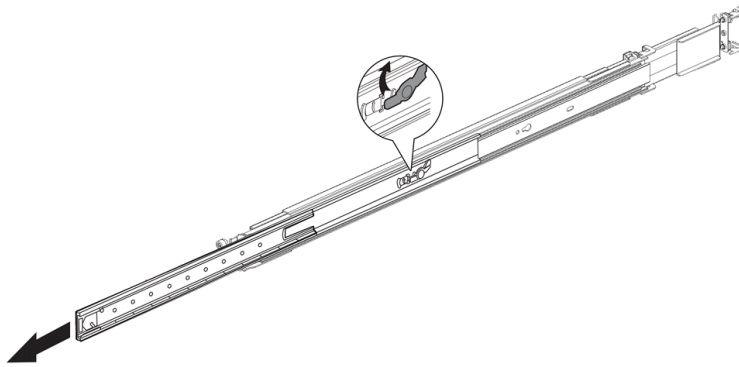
Attaching the Slider Assembly to the Front Rack Post
